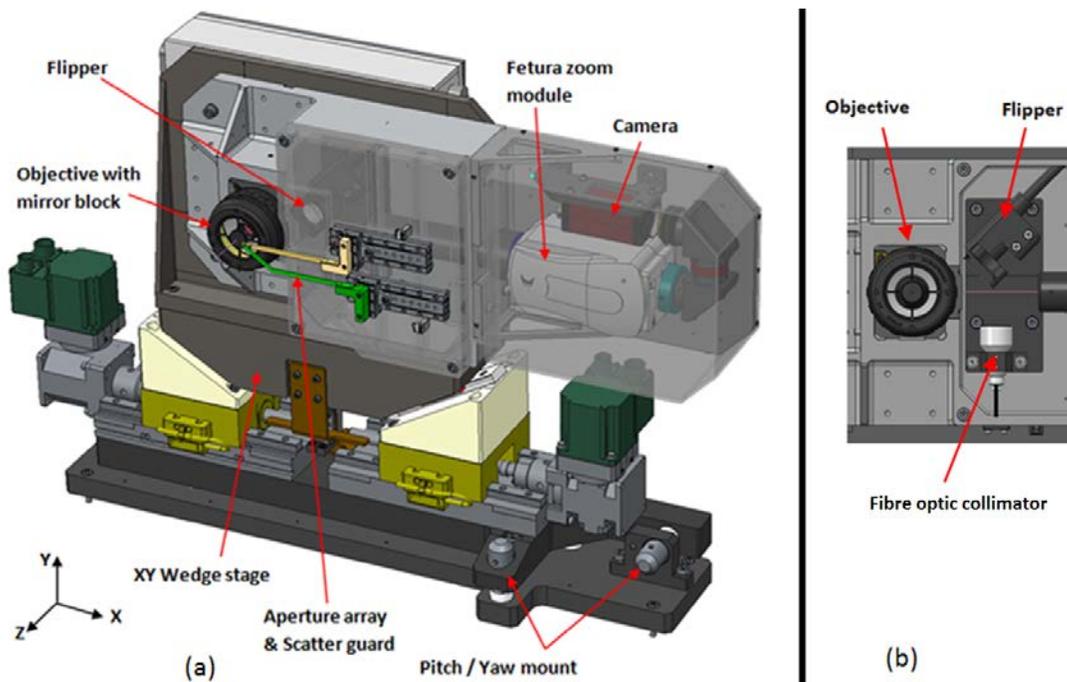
(a) 3D model of the new on-axis viewing system (b) Partial view showing the flipper and collimator
